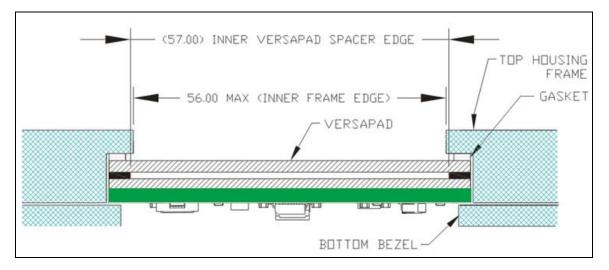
Side view of bottom side mounting. Drawing is not to scale
